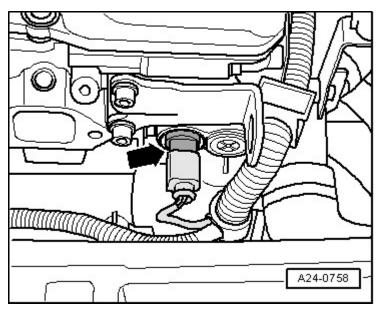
Component Location Of Engine Coolant Temperature (ECT) Sensor G62 Courtesy of AUDI OF AMERICA, LLC
